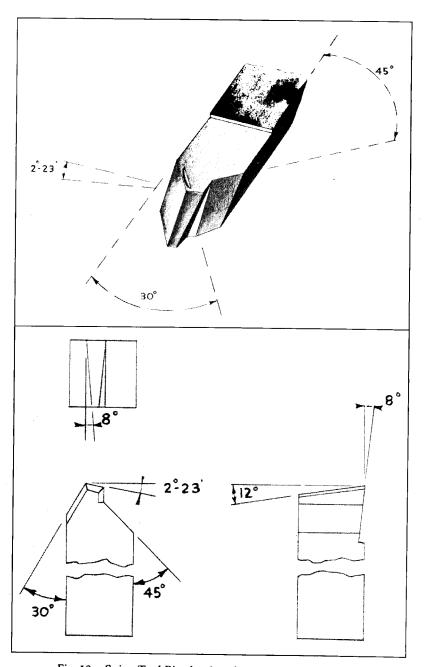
Swing Tool Bit, showing clearance and rake angles
